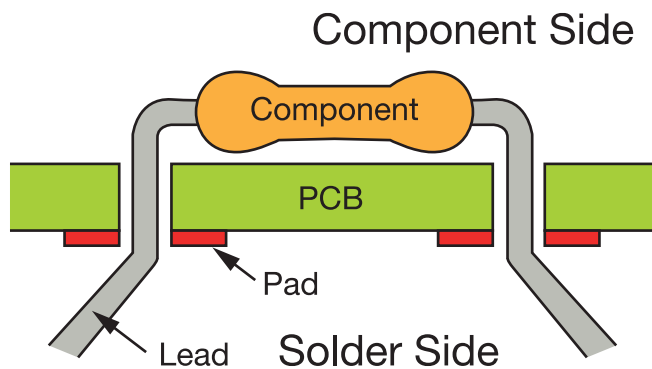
Components mounted on one side and soldered on the opposite side.
